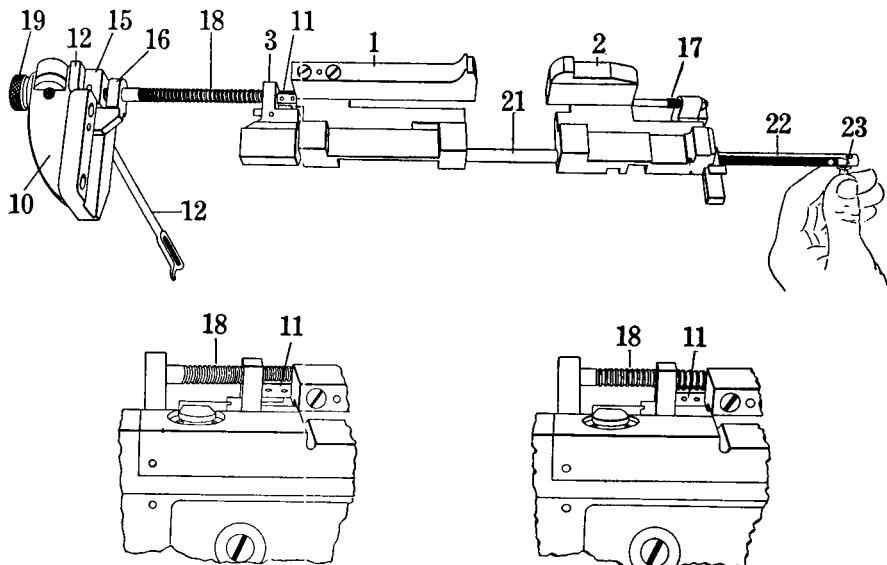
Plan view, in perspective, of the vise jaws and the attachment for setting the left-hand vise jaw by the operator while seated at the machine.
